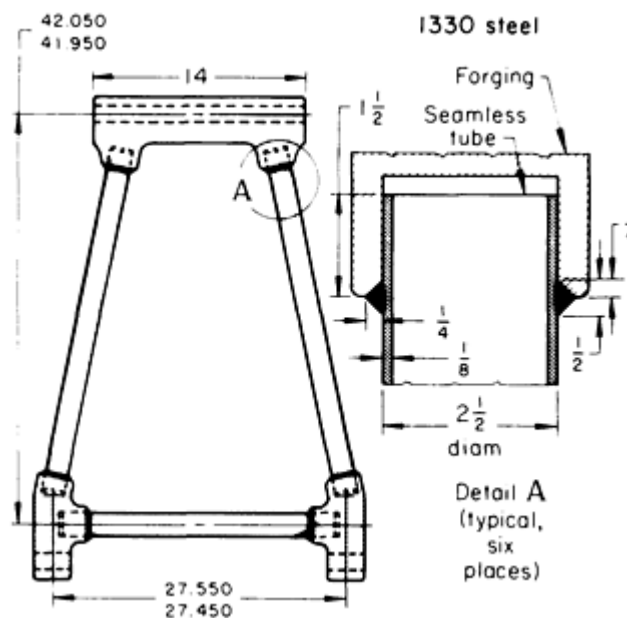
OXYACETYLENE WELDING OF AIRCRAFT LANDING GEAR SUPPORT. USE OF OAW REDUCED HAZ HARDNESS AND ELIMINATED NEED FOR POSTWELD TEMPERING. MEASUREMENTS SHOWN IN SCHEMATIC ARE IN INCHES.
